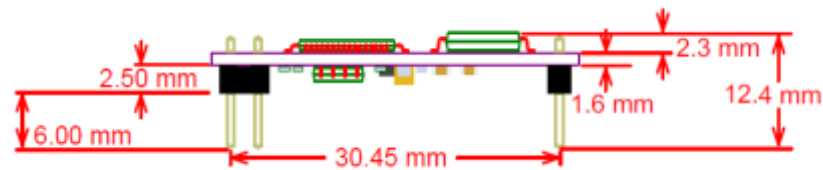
W5500S2E-S1 dimensions figures - Side view
